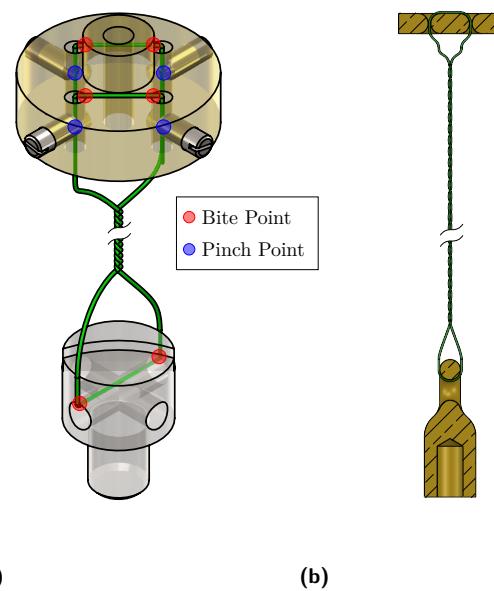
(a) The original TSA string loop between the string clamp and capstan bolt, with “pinch” and “bite” points indicated, where premature string failure may occur. (b) Section view of the new TSA string loop showing how the pinch and bite points have been eliminated.
